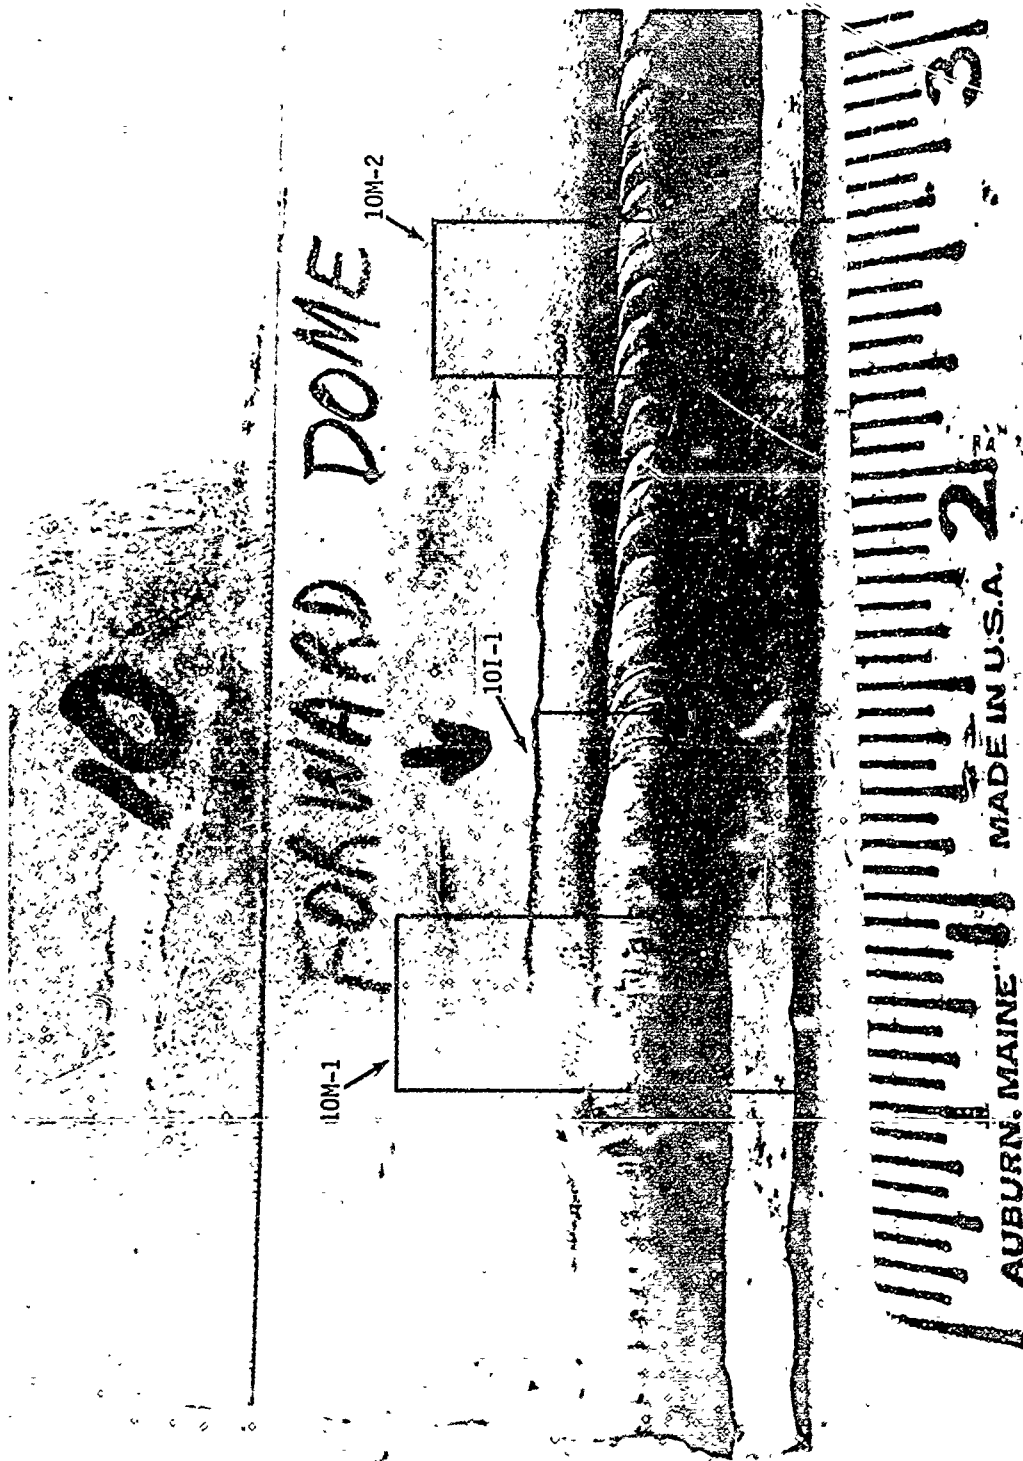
Specimen No. 10 (Cutout G) Showing Crack in Forward Dome
